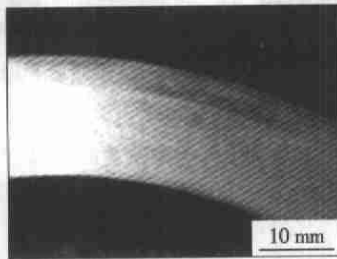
Typical images of steel weld pool in TIG welding
